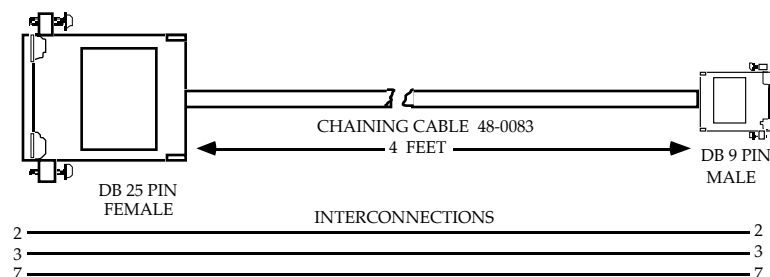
Chaining Cable [Auxiliary Port to RS-232 Port (48-0083)]
